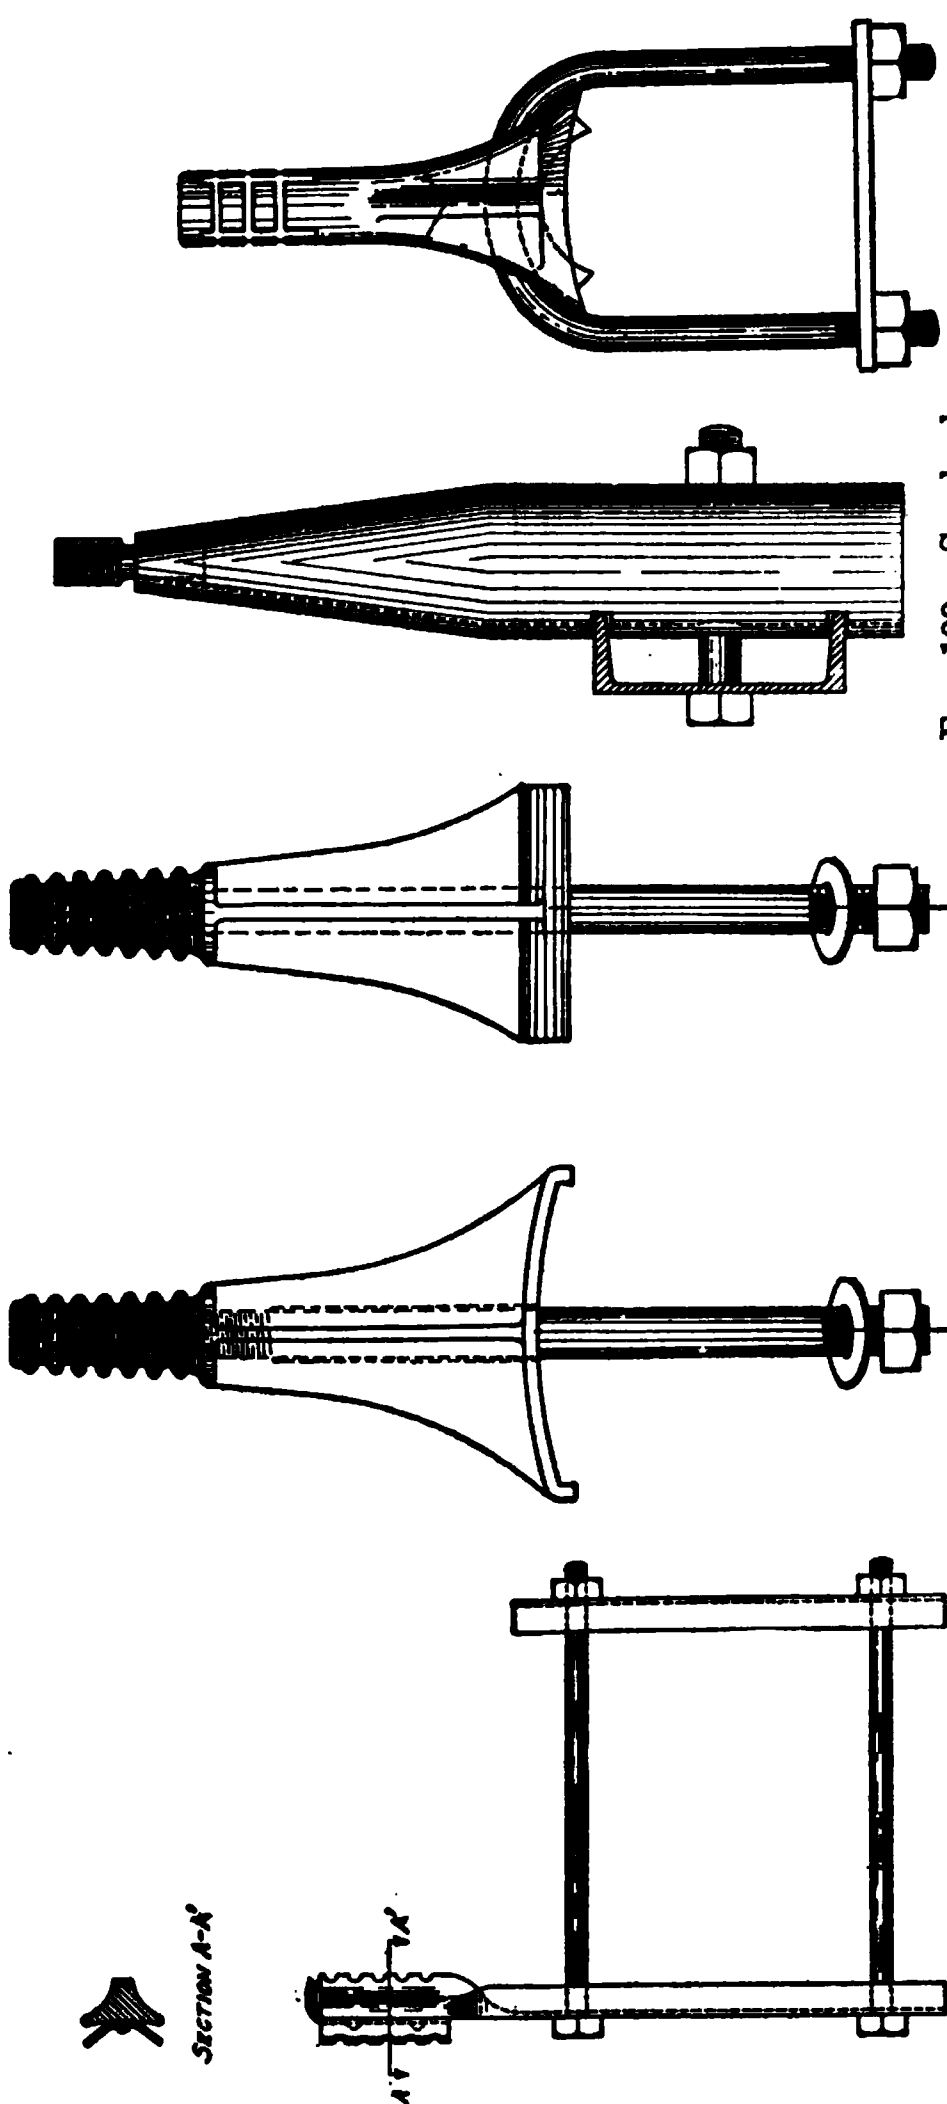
Clamp pin, with flexible metal stamped thread.
